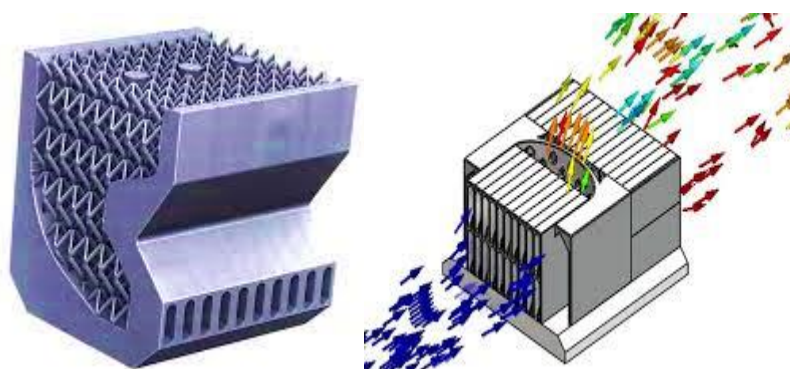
3-D Printed Complex Oblique Faced Heat Sink
